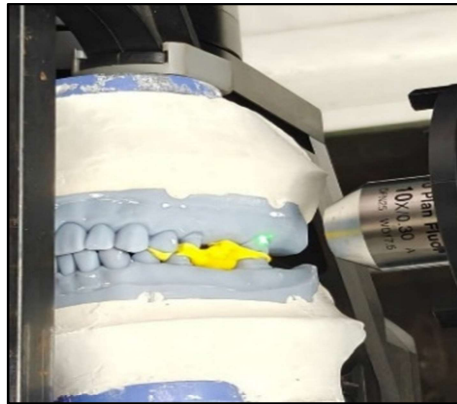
Measurement with Bruker Alicona uCMM Vision Inspection System.
